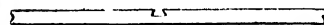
Dovetail Notch in Blind Rod for Fixing Spring.
